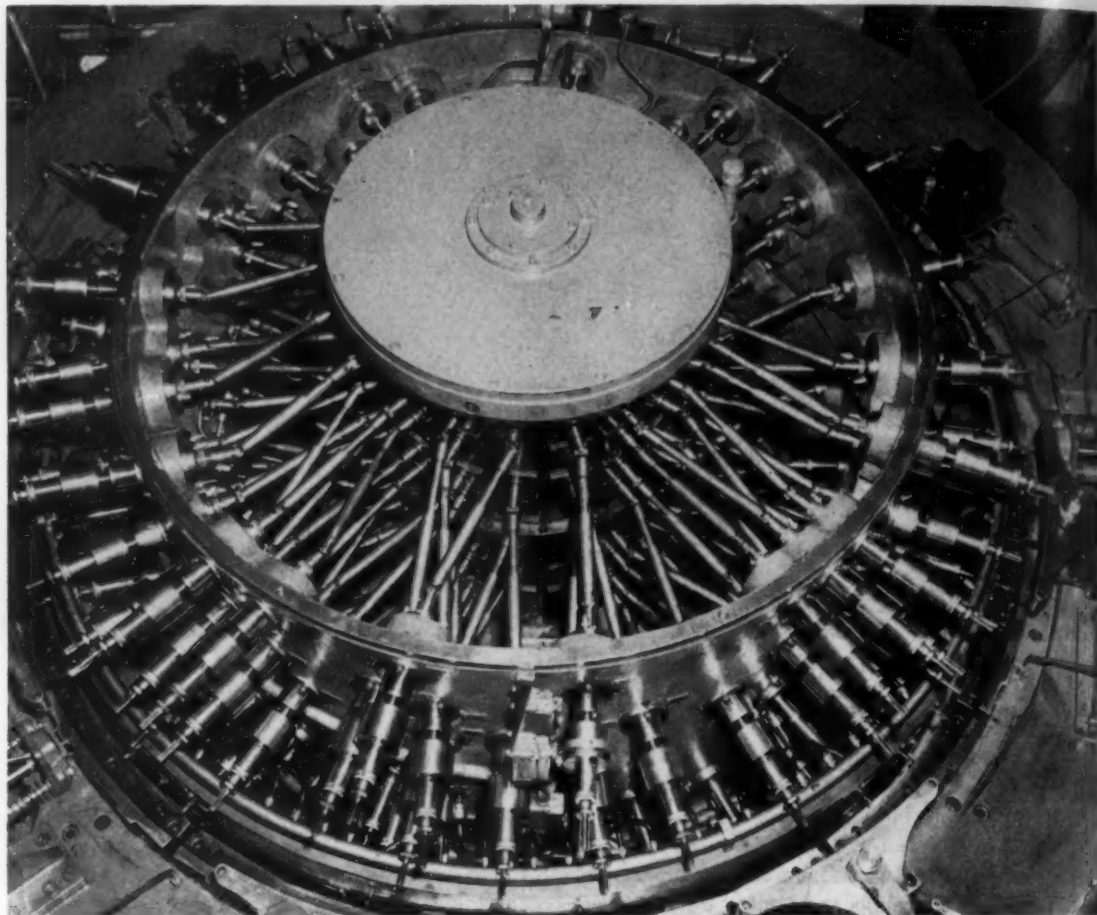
Power for drills and taps is conveyed from gears to spindles through 122 universal joints. In addition to variable feeds and speeds of drills and taps, the machine has rapid traverse for all tools.
